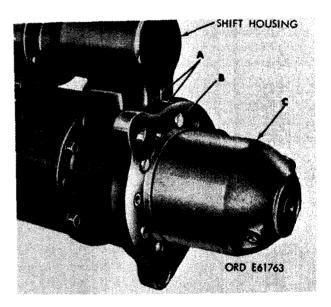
Removing or installing pinion housing assembly attaching parts.
